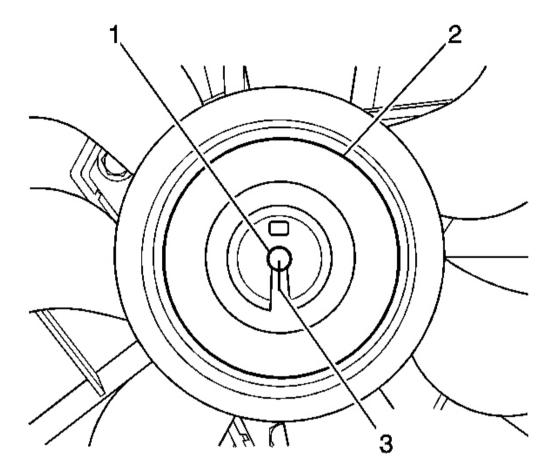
View Of Cooling Fan Motor Courtesy of GENERAL MOTORS CORP.
